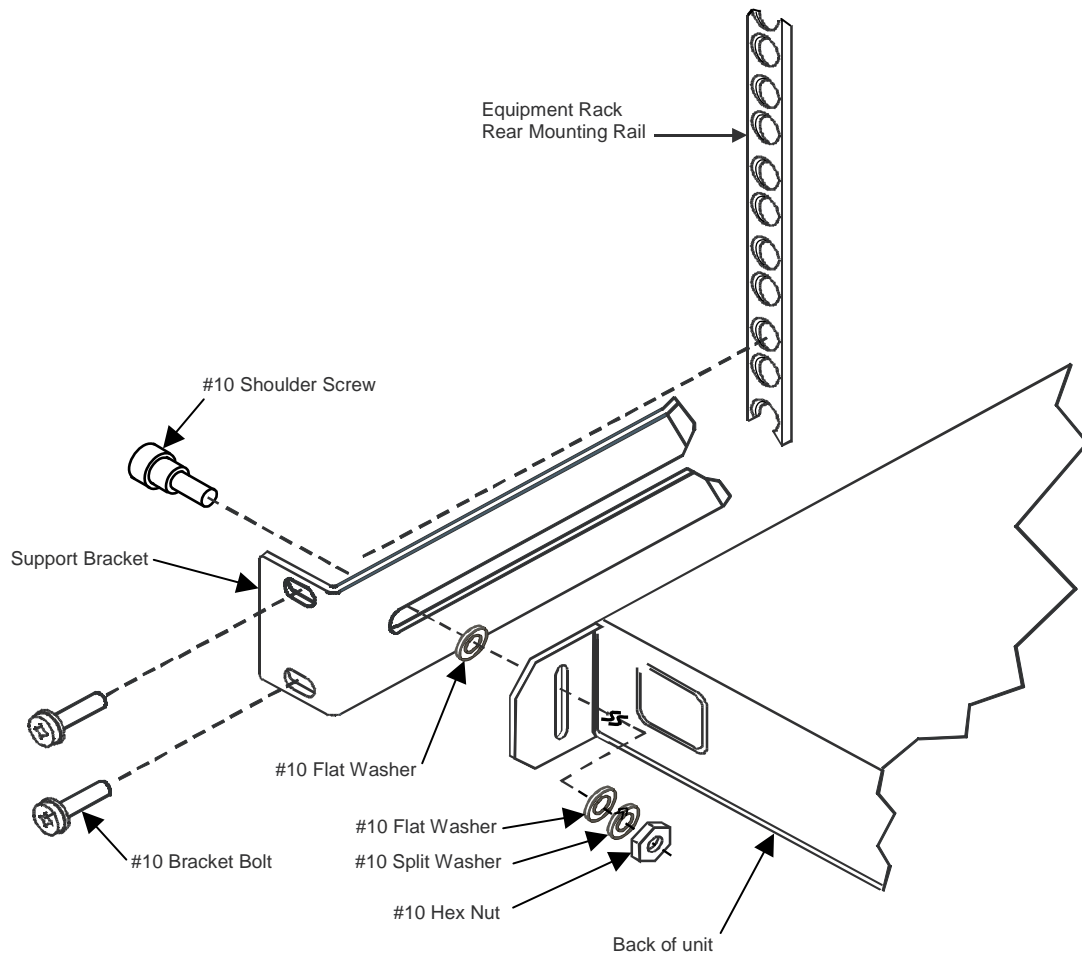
Installation of the Optional Rear-Mounting Support Brackets
